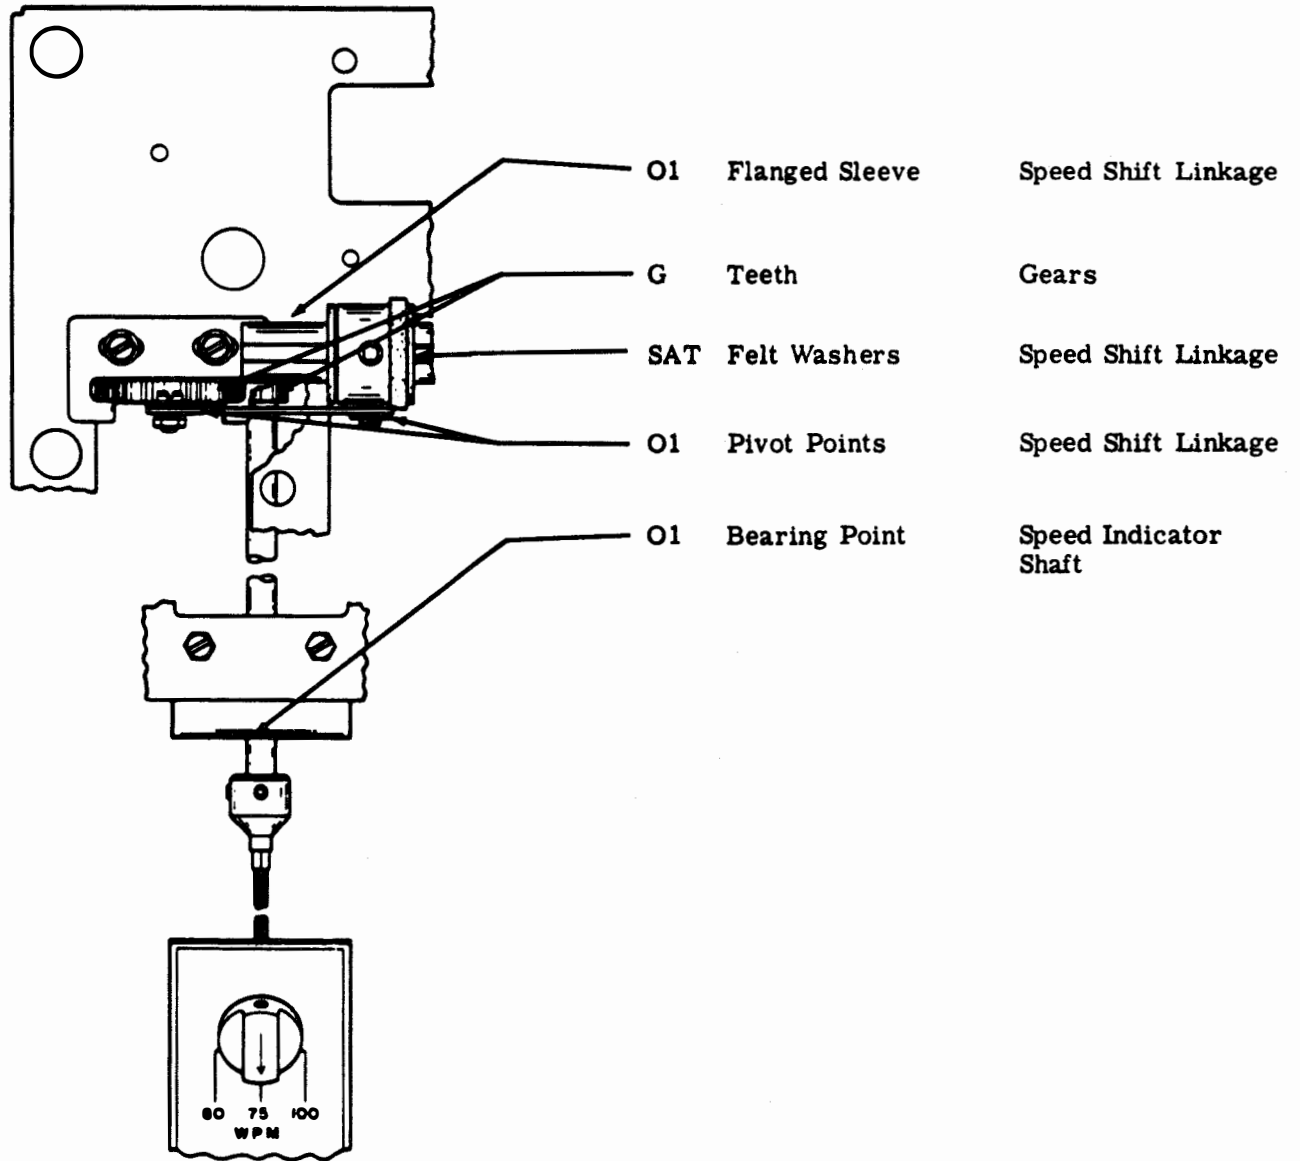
Gearshift Mechanism for Tape Printer Keyboard
